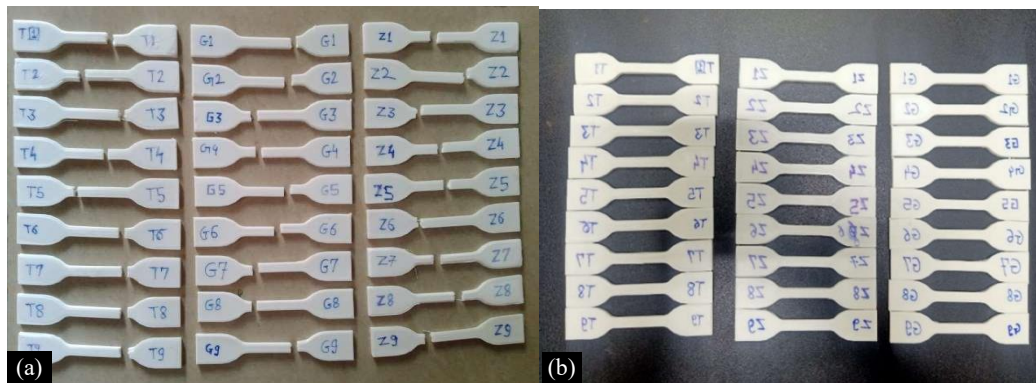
3D printed tensile test specimens before and after the test (a) After tensile test (b) Before tensile test.
